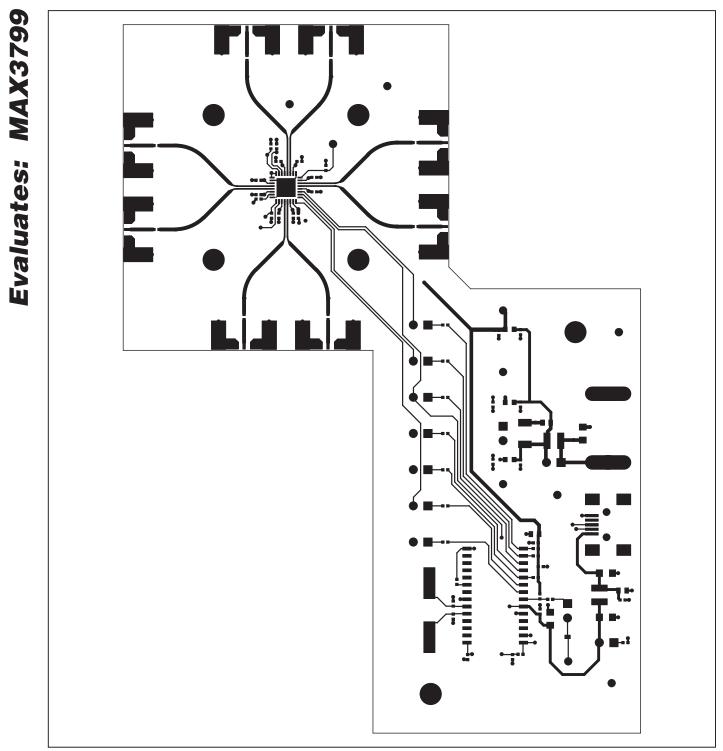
MAX3799 EV Kit PCB Layout—Component Side
